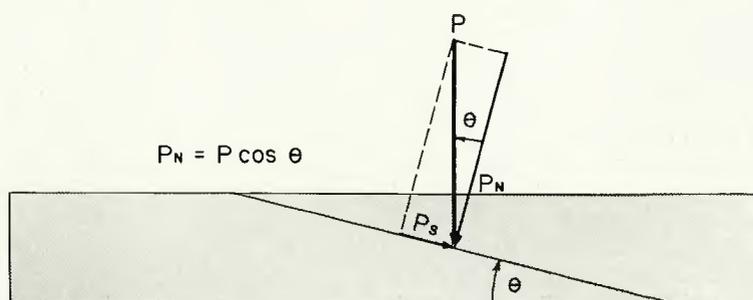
Scarf joint configuration used for welding superconductor composites. Magnitude of compressive component P_N approaches that of pressing force P as $\cos \theta$ approaches 1, or as scarf angle θ approaches 0 deg
